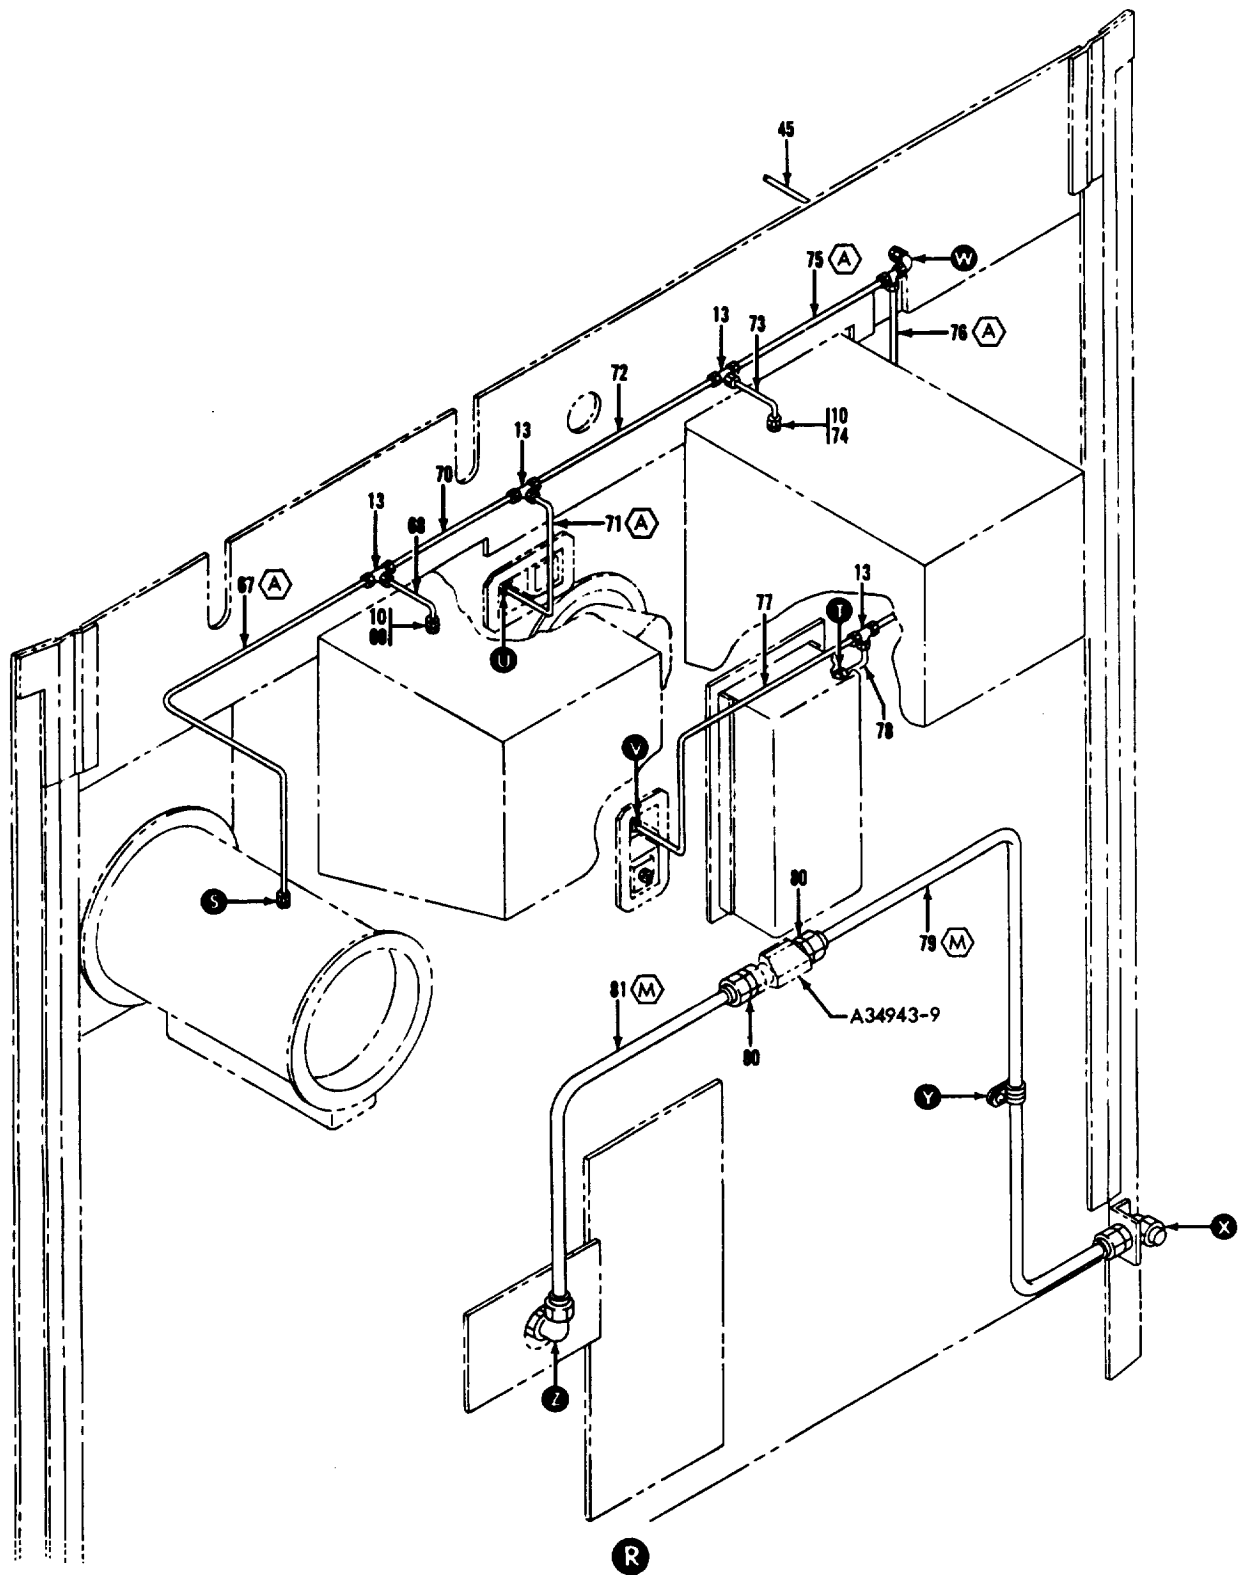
Tubing Installation (Sheet 6 of 17)
